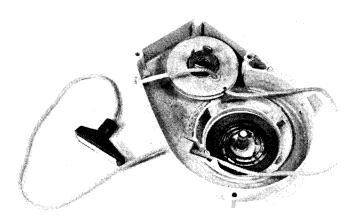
Spring Secured into Housing with Screw Prior to Installing Pulley
